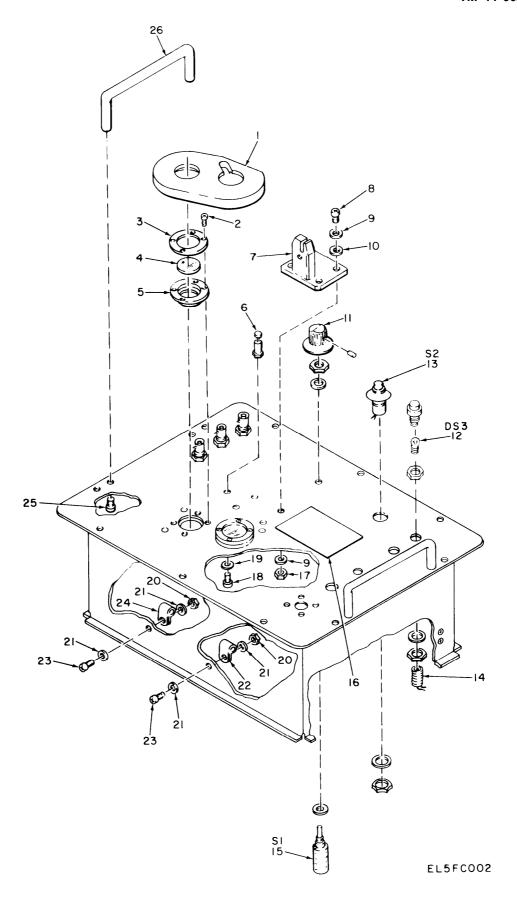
Electronic Test Set Assembly (Sheet 1 of 2).
